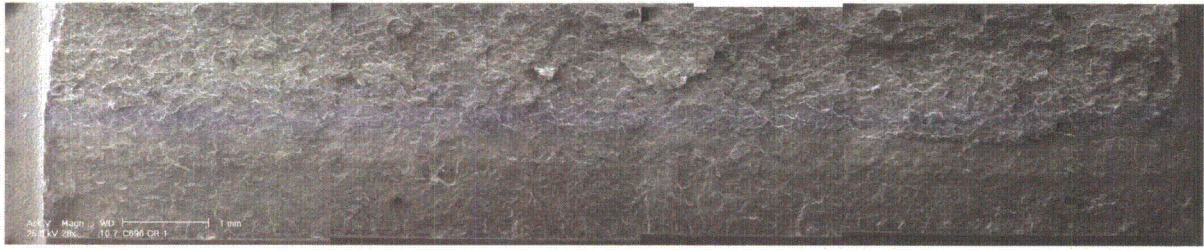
Fracture surface of specimen A690WC-ST-2. Crack advance is from bottom to top.
